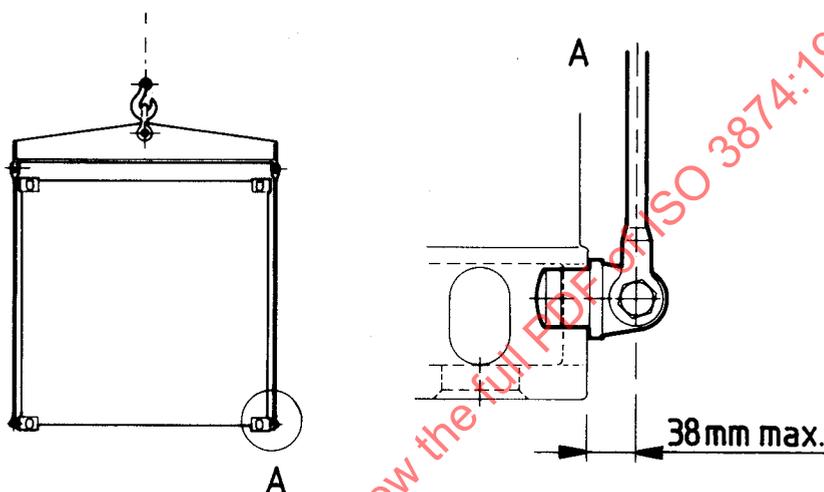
Lifting devices make contact with the bottom corner fittings only
